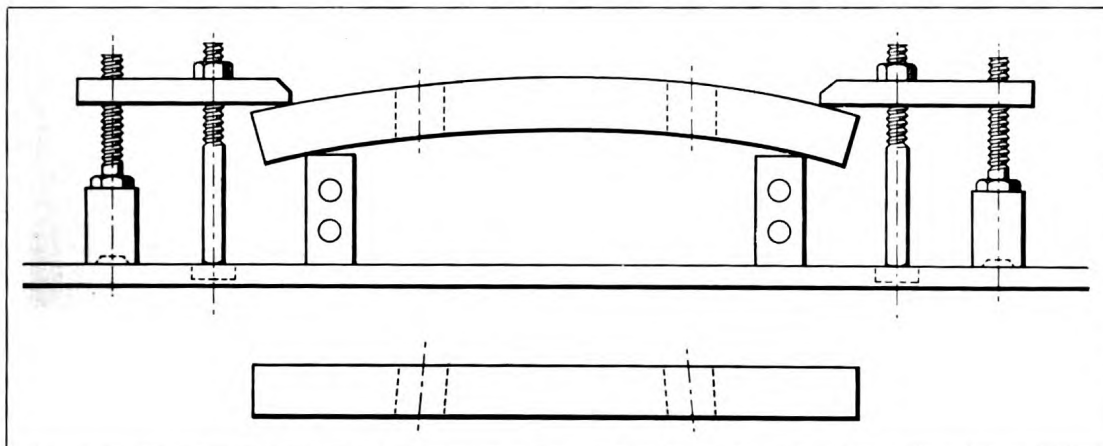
Spring induced by unsupported clamping will result in non-parallel axes of holes machined in such a setup.
